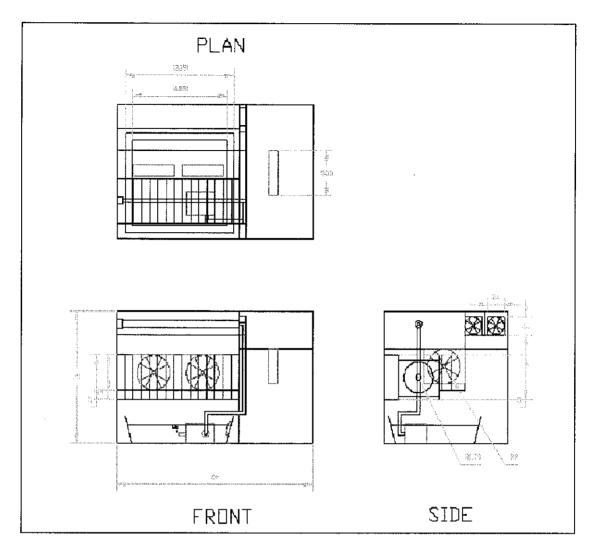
The layout drawing of the indirect evaporative cooler
